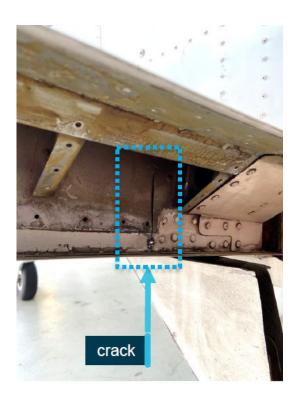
Cracks Emanating Above and Below the Critical Hole (Flap closeout panel removed in this photo)
